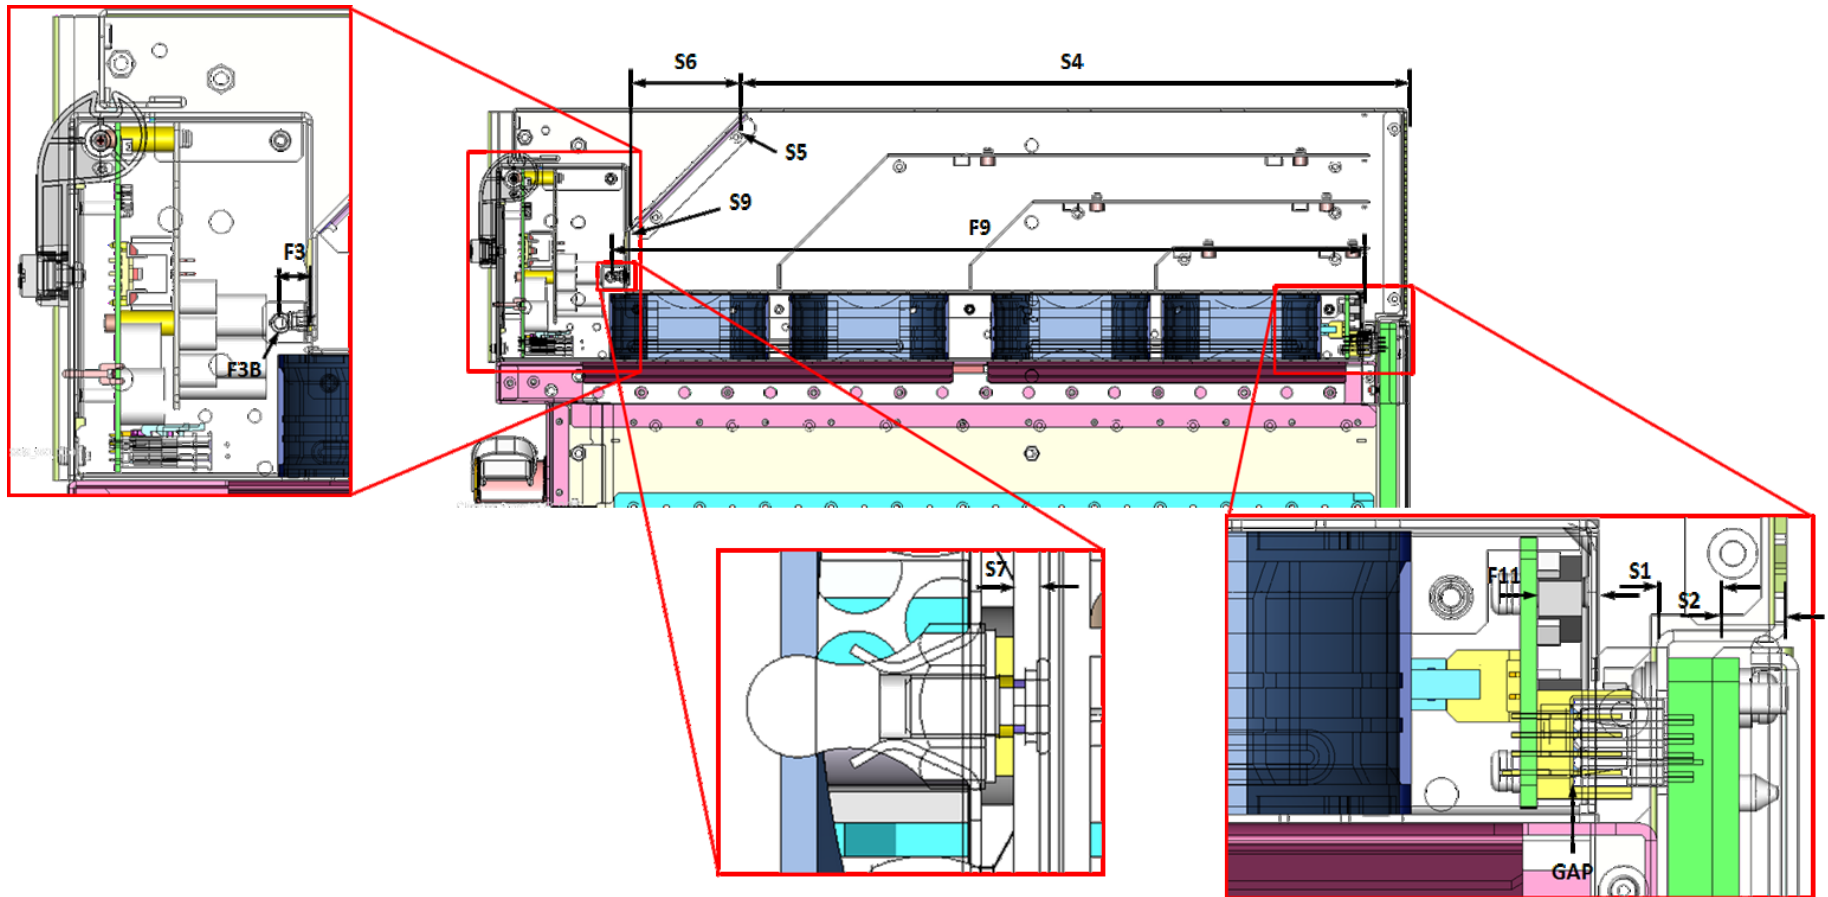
Tolerance Loop – GEN1 Fan Unit to Shelf - EMI Gasket Hard Stop
